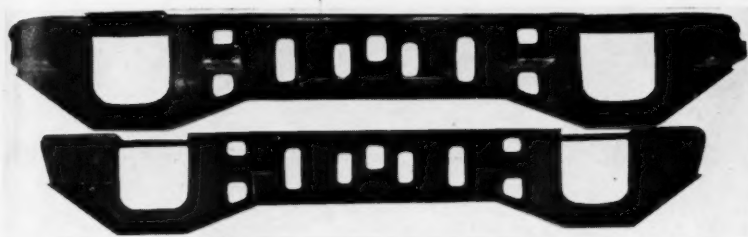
All-welded bogie frame for diesel-electric railcar at Buenos Aires
